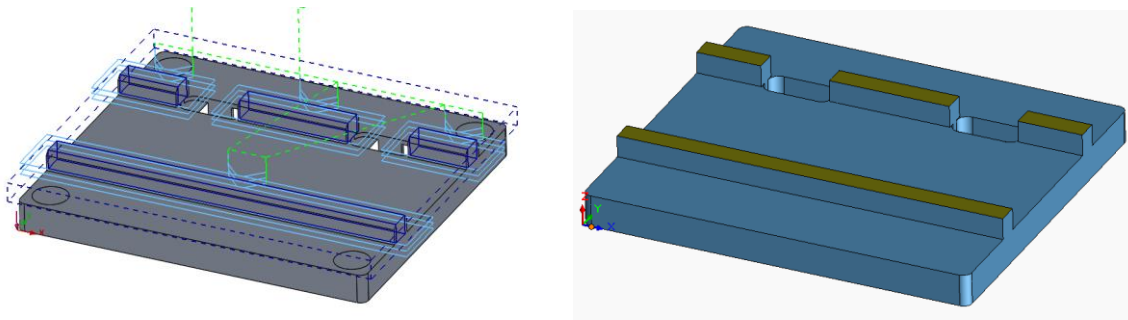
Machining the bottom tracks (a) Tool path (b) Machined result
